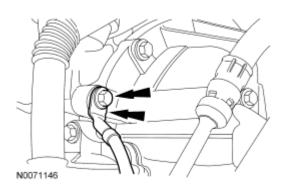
Locating Starter Motor Stud Bolt And Nut Courtesy of FORD MOTOR CO.
